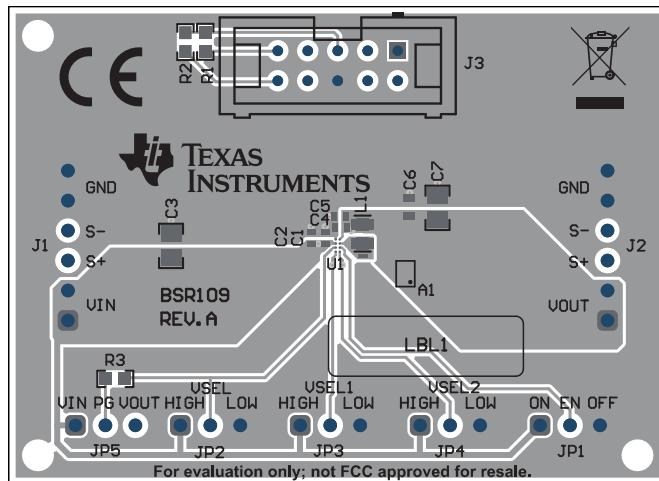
TPS6286x0EVM PCB - Assembly Layer
